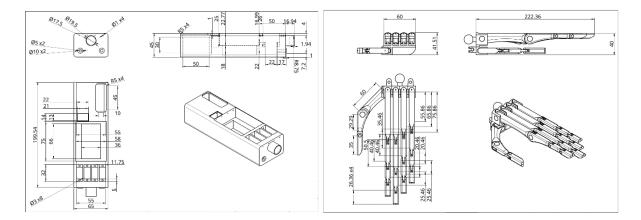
Drawing of the forearm (left) and hand (right with dimensions)
